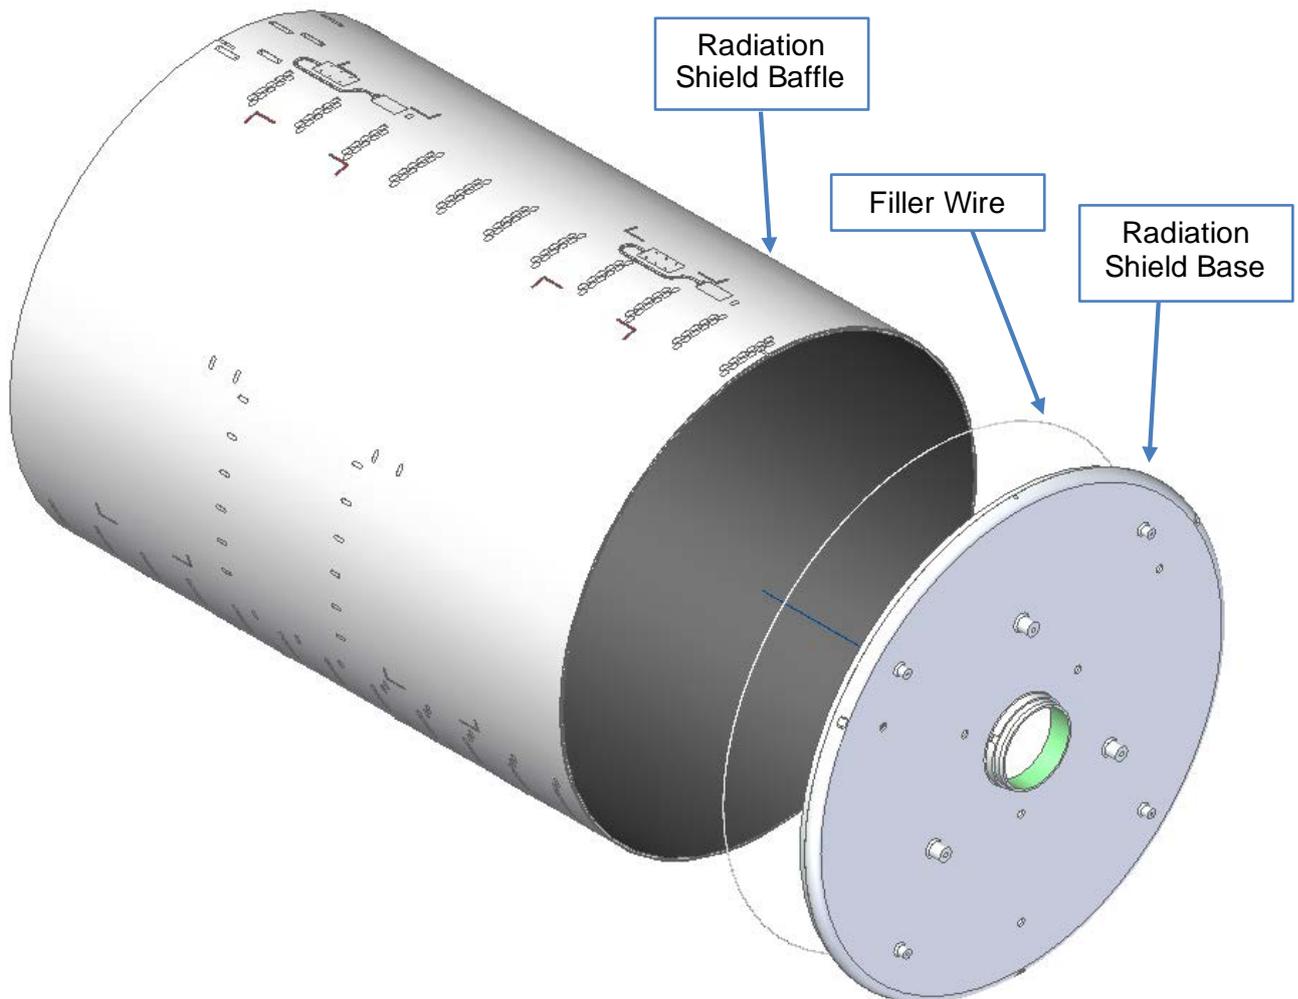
Radiation Shield Welded Assembly (exploded view)
